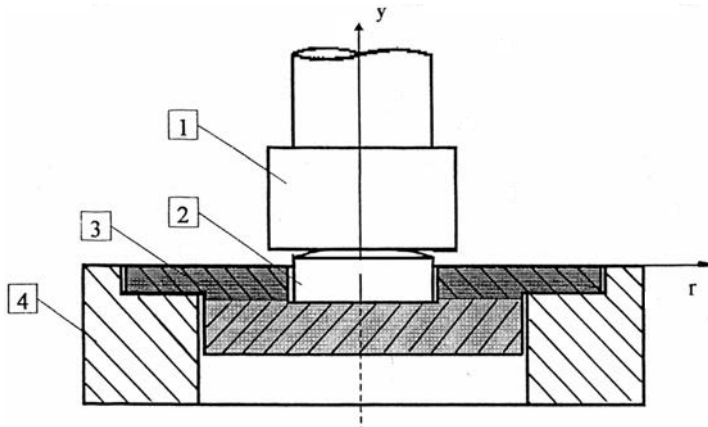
Test specimen and diagram of the ram tensile test stand, where: 1 – pusher, 2 – stamp, 3 – test specimen, 4 – base.
